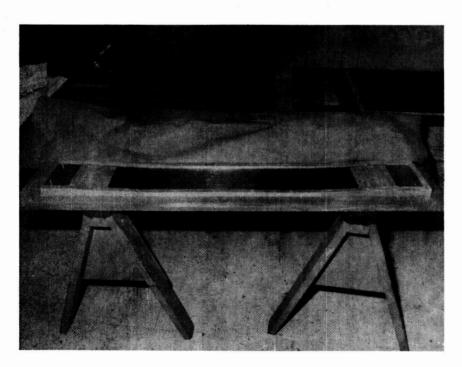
Overall View of Skin Tool with Completed Skin Layup
